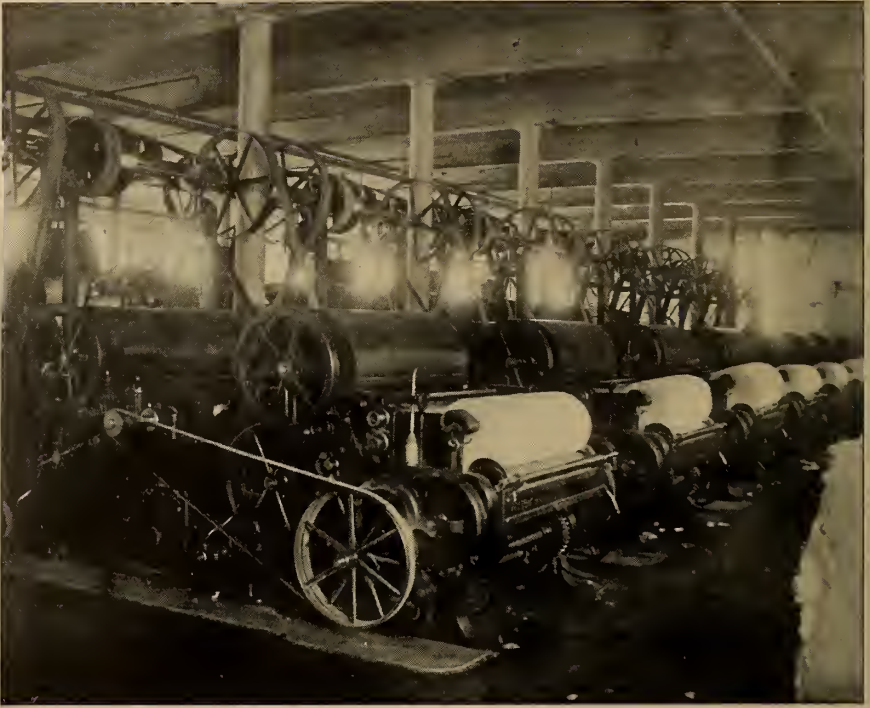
A PICKER ROOM DRIVEN BY THE OLD SYSTEM WITH BELTS AND SHAFTING
